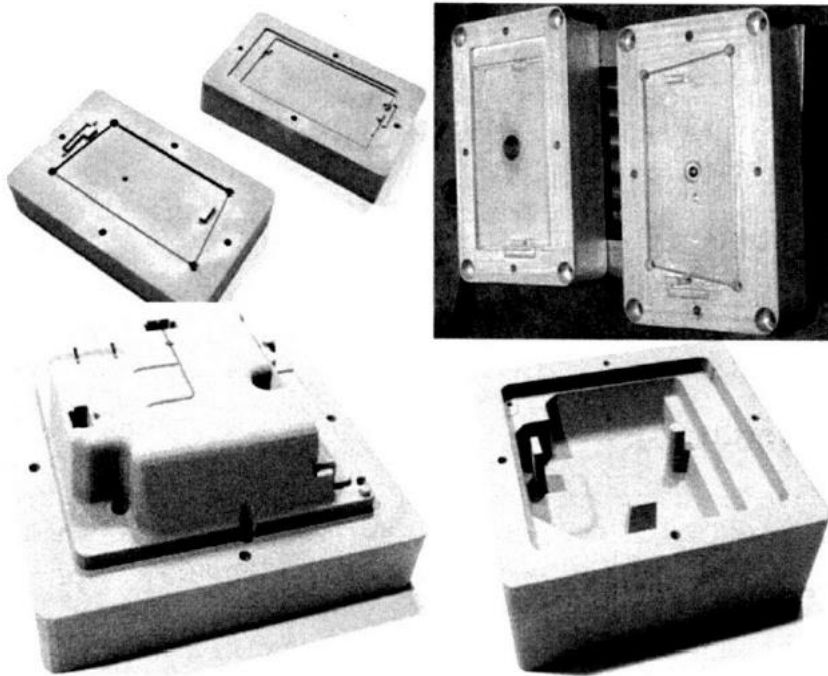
Alumide® inserts in an IM tool [6]
